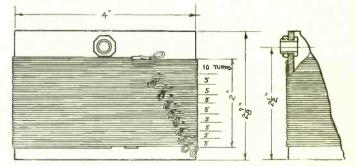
Detailed sketch of the primary of the coupler, showing the manner in which taps are to be taken. If a fibre tube is used to wind the coil, the brass bushing will be unnecessary.
